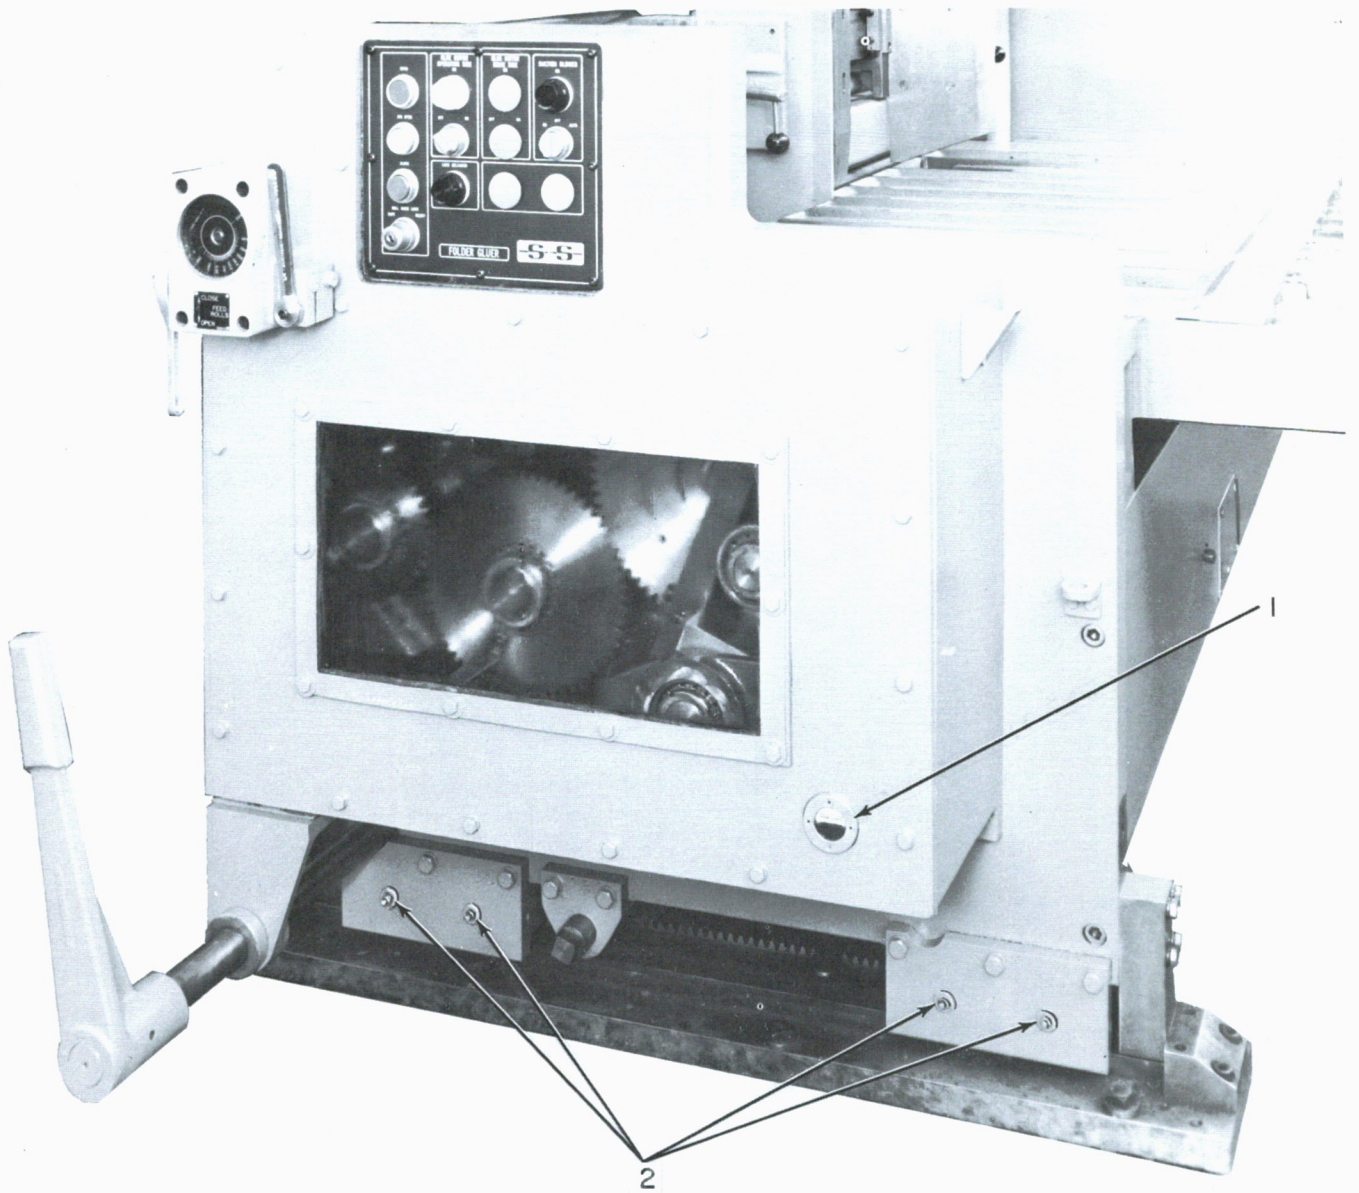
FEED SECTION LUBRICATION, OPERATING SIDE
